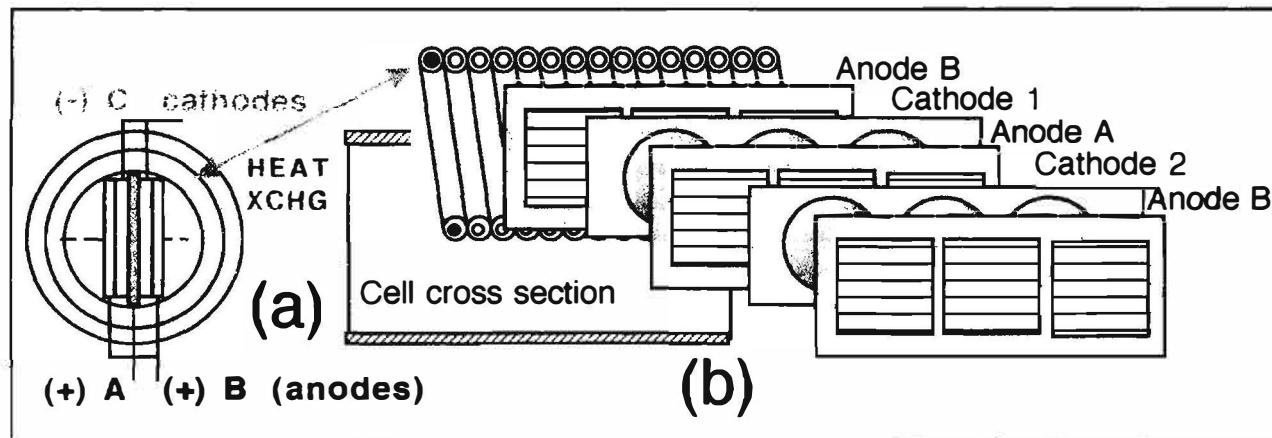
End (a) and exploded (b) views of 2 kilowatt cell design approach .
